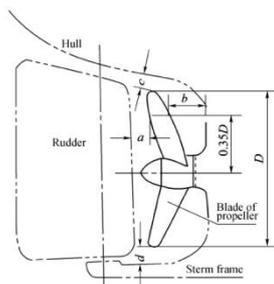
Clearance between the propeller and the stern frame or between the propeller and the rudder
